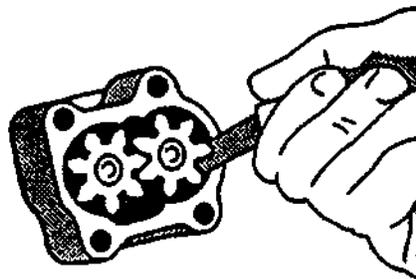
Measuring Oil Pump Radial Clearance
